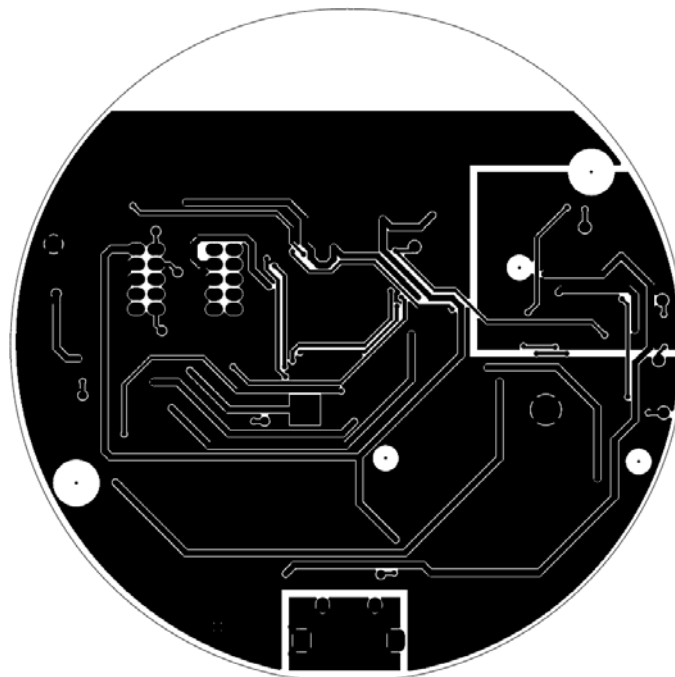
KW40-HRM-RD reference board layout (bottom view)
